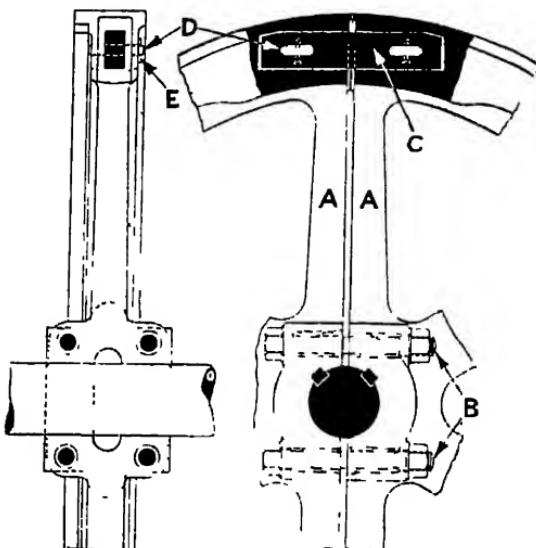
FLYWHEEL WITH SPLIT RIM AND BOSS
